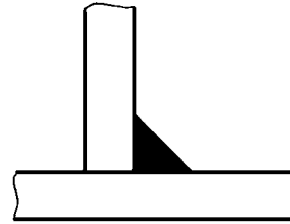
Standing fillet weld / Stående källsvets
